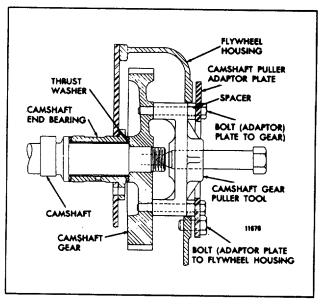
Removing Camshaft With Camshaft Gear Puller J 1902-01 and Adaptor Plate Set J 6202
